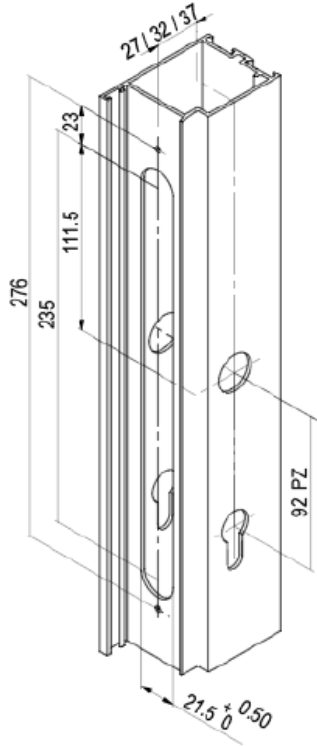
PE420, PE460, PE260, PE060 drilling. The cylinder and lever handle drilling are determined by the selected hardware.
